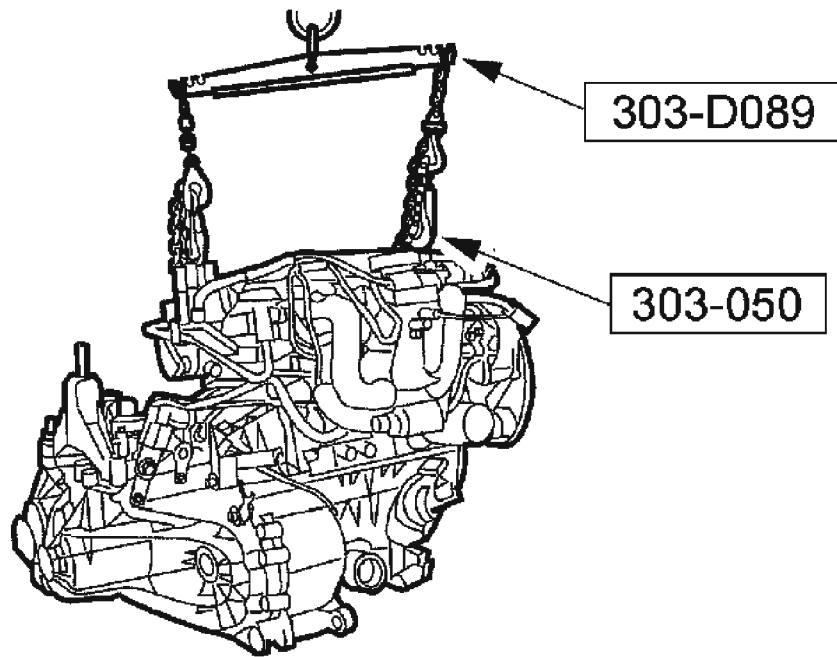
Removing Engine From Lift Table Using Engine Crane
